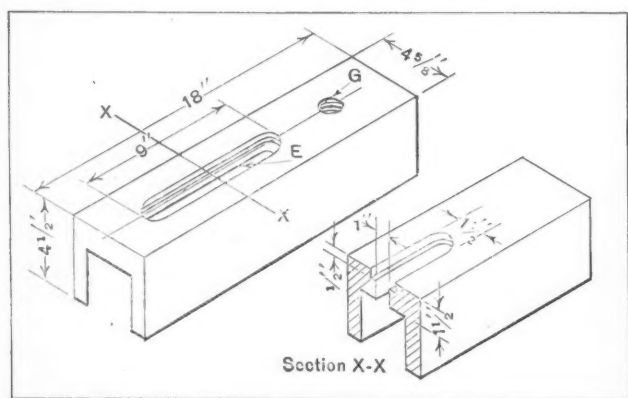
Driving-box Shoe Adapted for Use as a Work-holding Fixture
